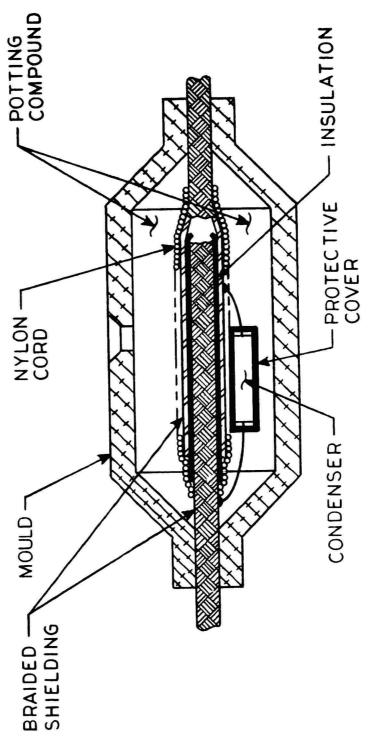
MOULDED PLASTIC GAP MOUNTING ARRANGEMENT
